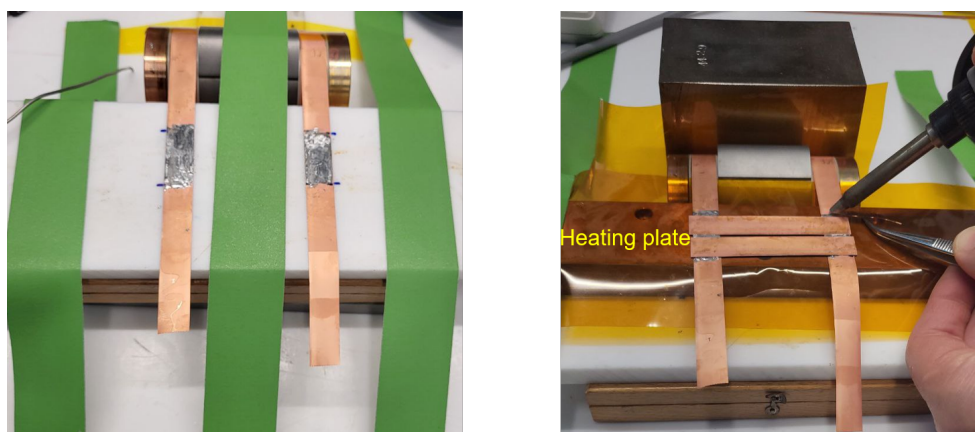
Soldered end turns (left) and soldered HTS bridge tapes on Soldered end turns (right).
